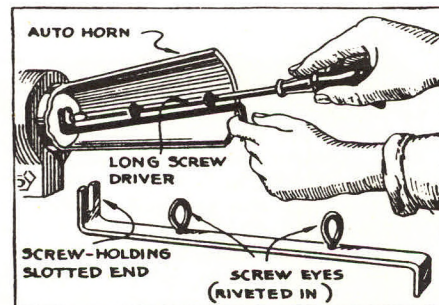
A slotted piece of flat iron or brass strip serves as a good and simple screw holder.
